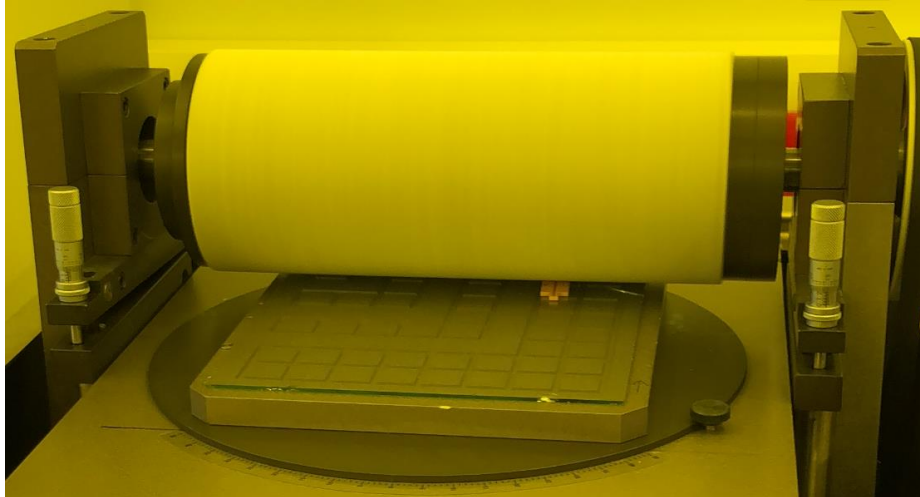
Rubbing a PCB by a LCD Rubbing Machine (model: MF-7)
